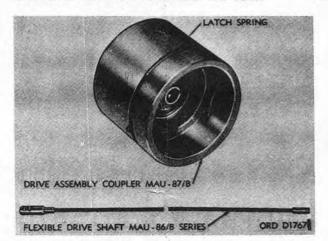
Drive assembly coupler: MAU-87/B and flexible shaft, drive: MAU-86/B series.
